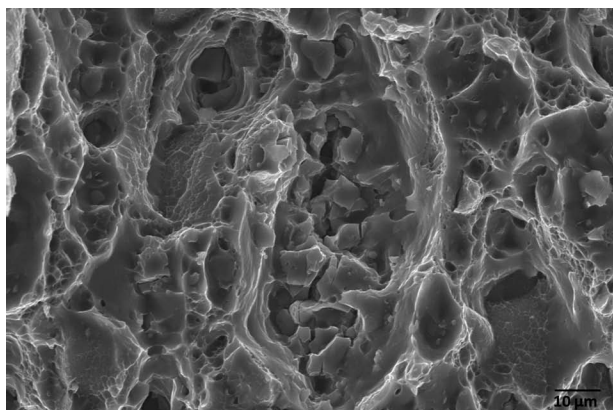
Higher magnified image of the fracture surface shown in Fig. 87. Note the dimples and cracking of constituent particles in the fractograph
